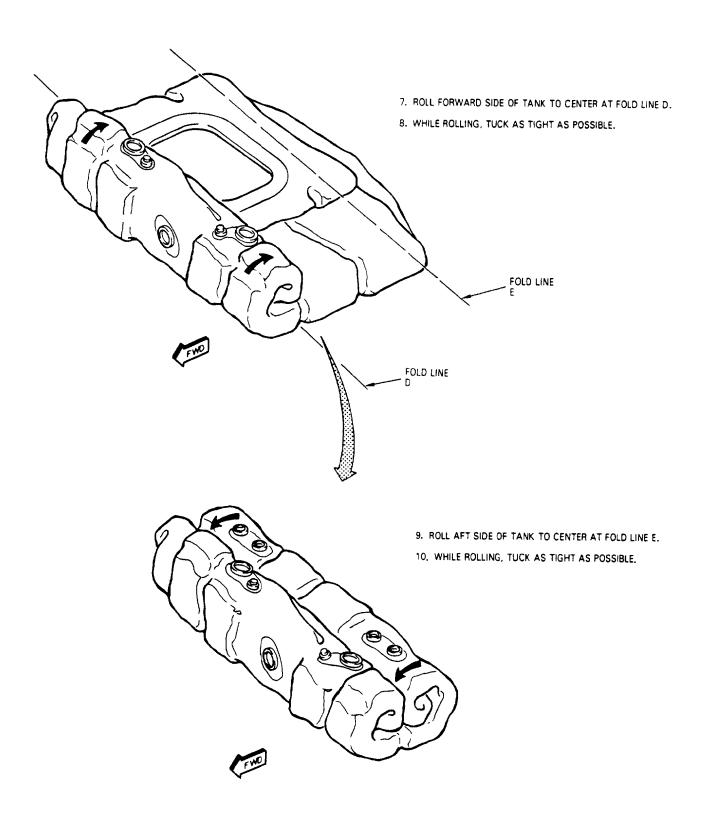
Installation - No. 2 Fuel Tank Folding (Sheet 3)
